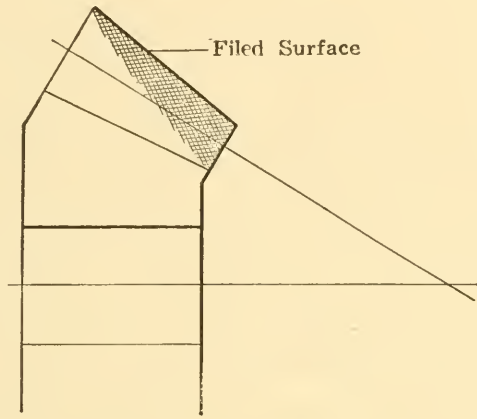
THE FILED SURFACE OF MILLED BEVEL GEARS.
